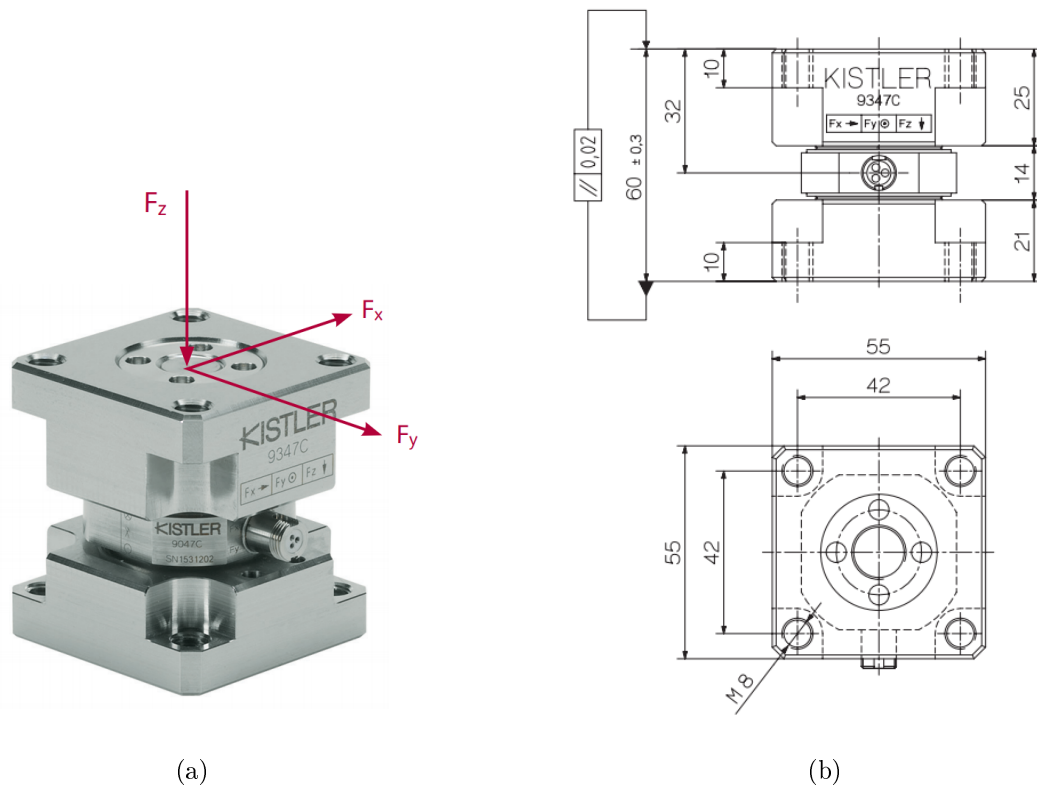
(a) Picture of the dynamometer used for measuring forces generated in the contact, (b) Engineering drawings of the dynamometer showing its dimensions
